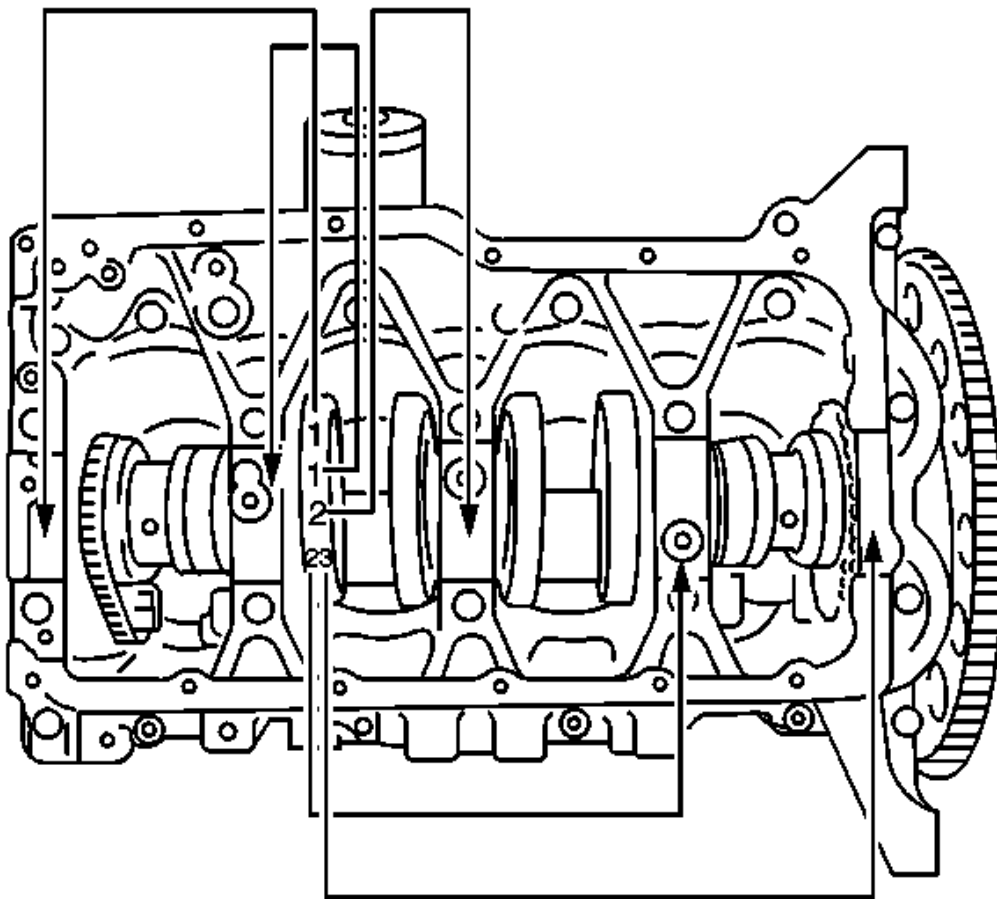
Locating Numbers & Letters Imprinted On Cylinder Block & Crankshaft
